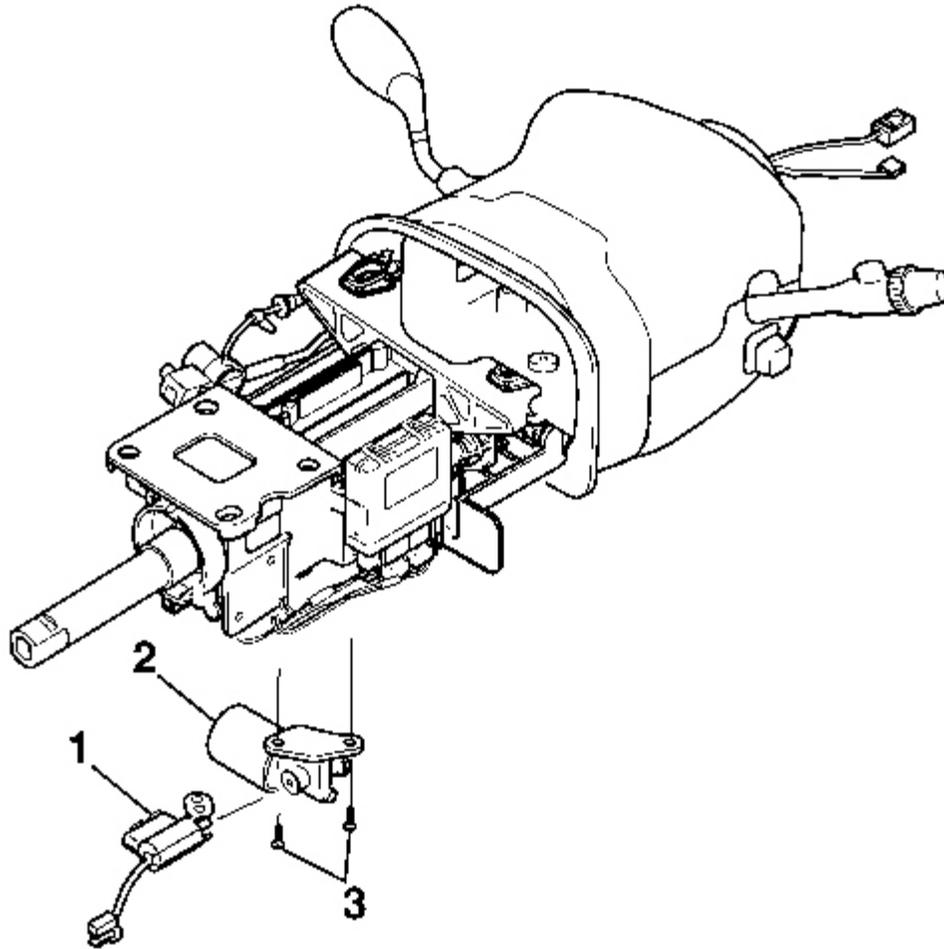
View Of Tilt Cable & Tilt Actuator Assembly
